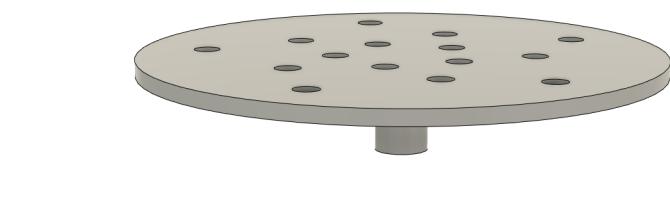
Step 6 & 7 of the Open3DScanner assembly
